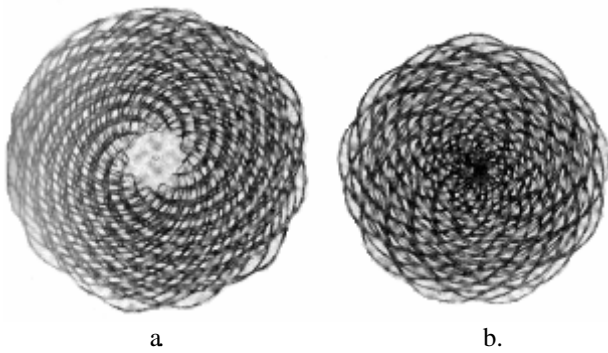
Aesthetic surfaces obtained by vibro-rolling on flat surfaces
